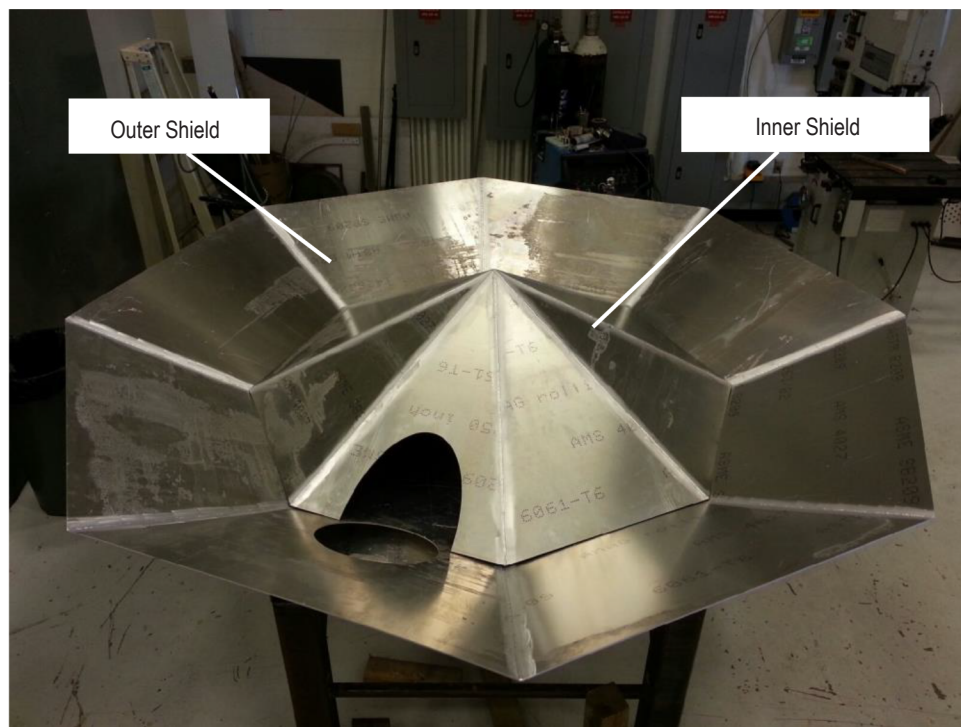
Inner and outer aluminum shield sections after being welded.
